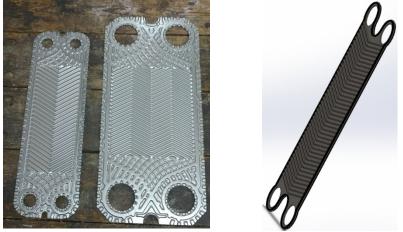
a) Heat Exchanger Plate Samples, b) Heat Exchanger Plate CAD Model
